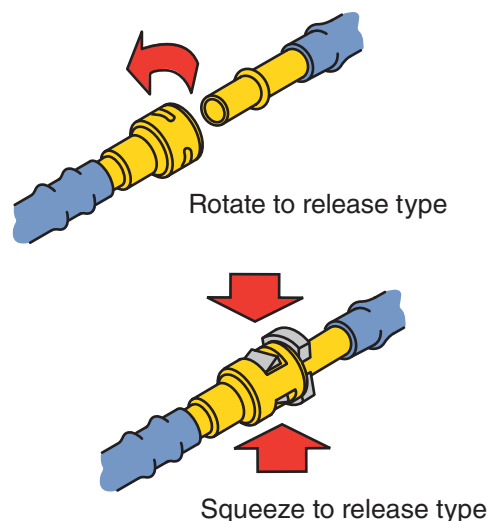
Quick-disconnect hand releasable fuel line fittings.
